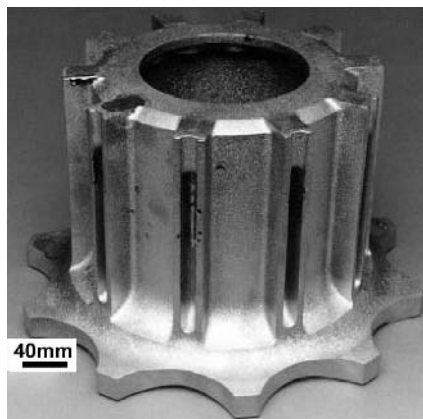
Cast brake torque tube for fighter aircraft, Ti-15-3 (courtesy R. R. Boyer, Boeing)
